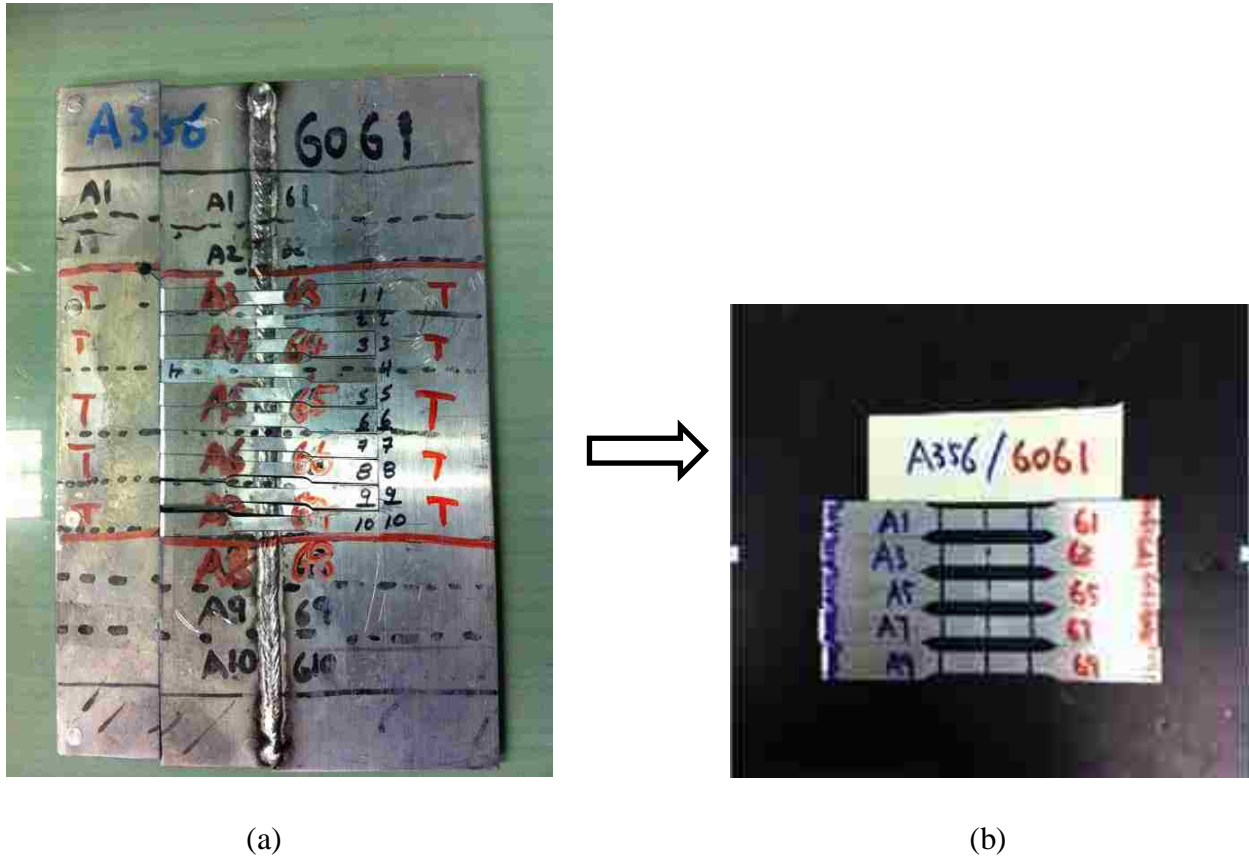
(a) Representative welded plates and (b) cutted specimens which joined cast alloy A356 to wrought alloy 6061.
